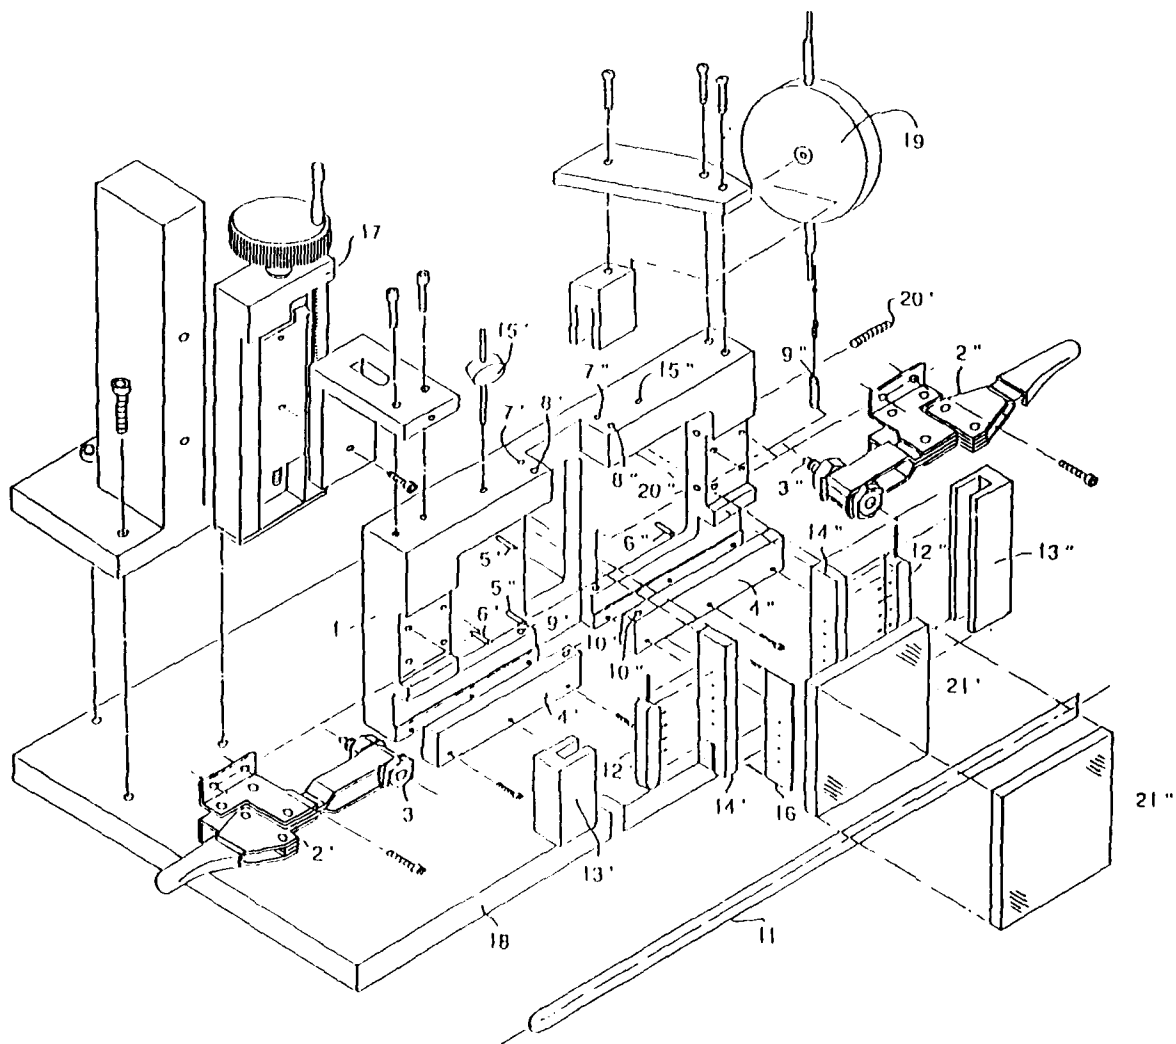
Exploded view of the thin-wedge-shaped cell, cell holder and translation stage.
